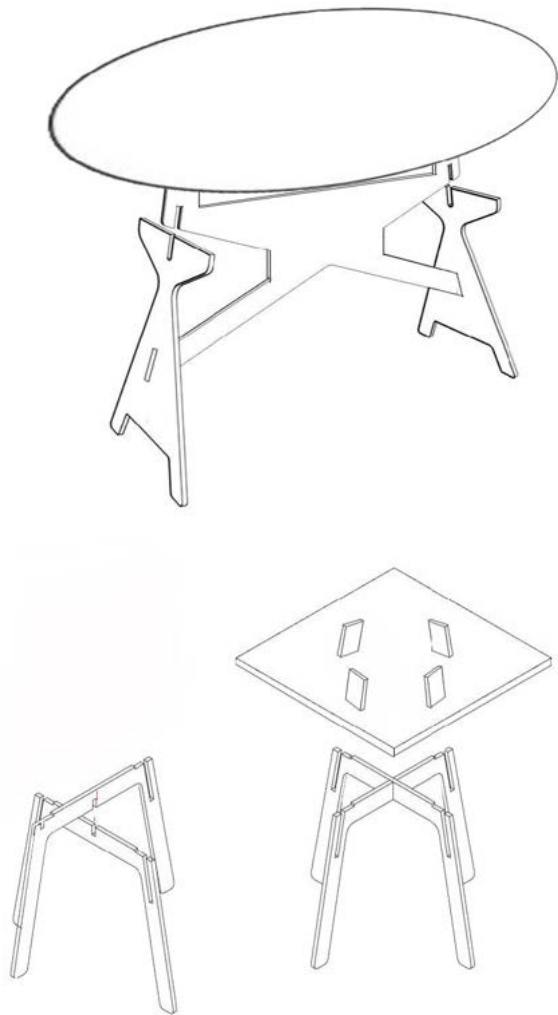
CNC drawing produced for large cafe tables Izolyatsia for easy assembly
